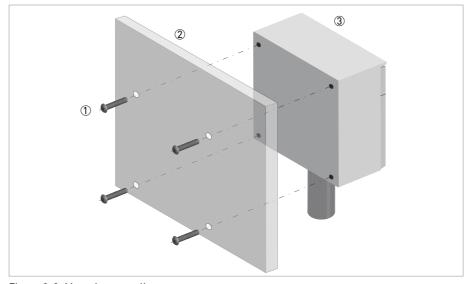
Mounting on wall ① 4 x M6 screws ② Wall
